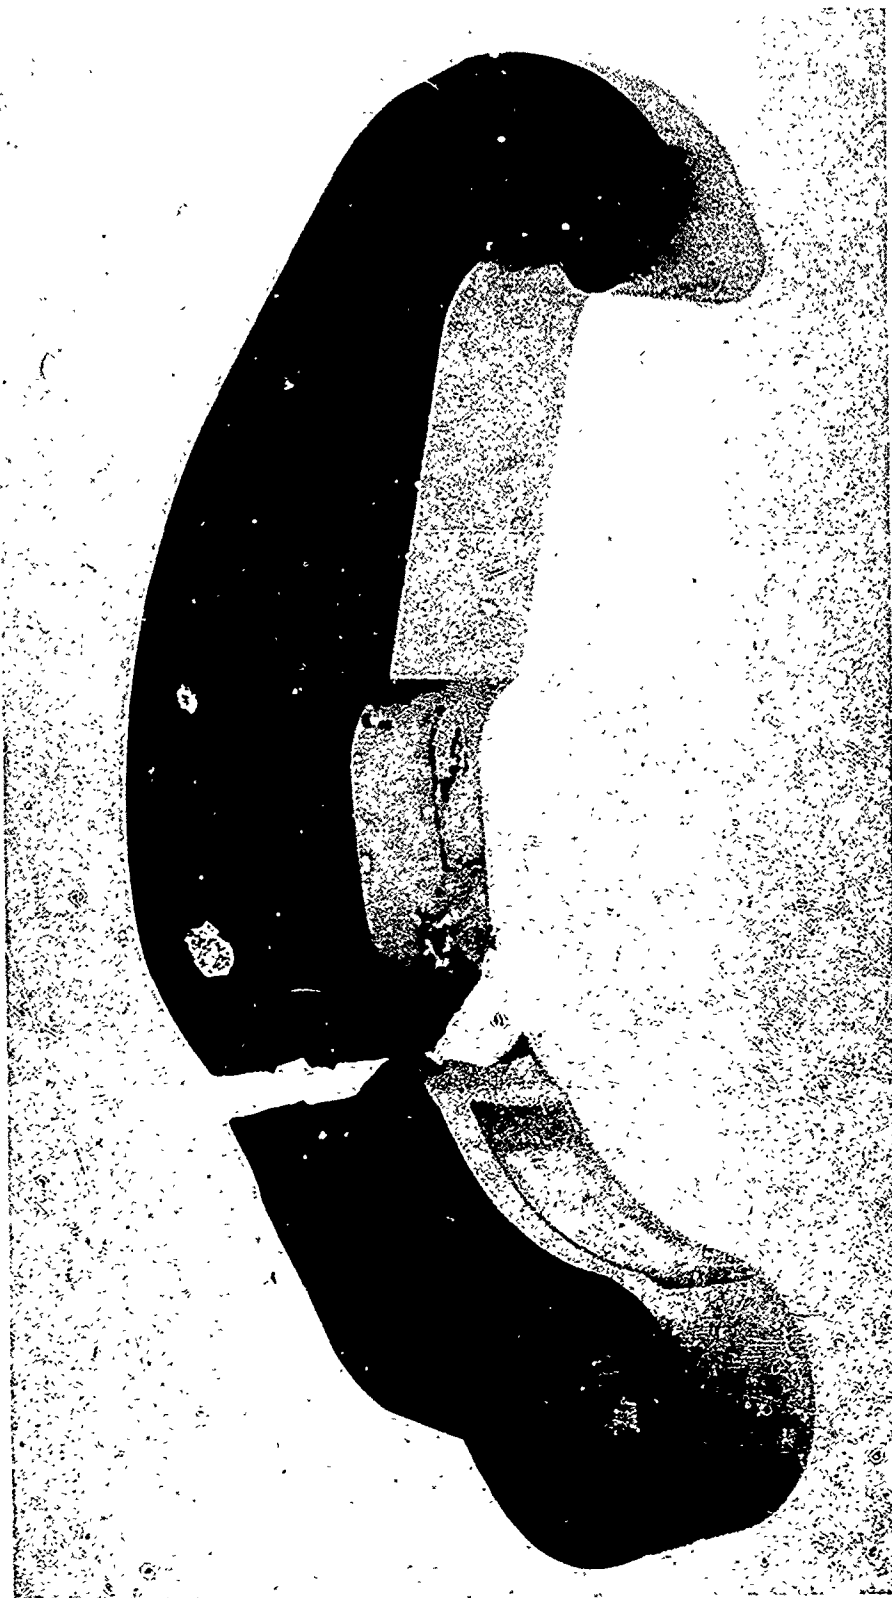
4330V MODIFIED STEEL CARGO LATCH HOOK AFTER TEST (LARGE SIZE)
